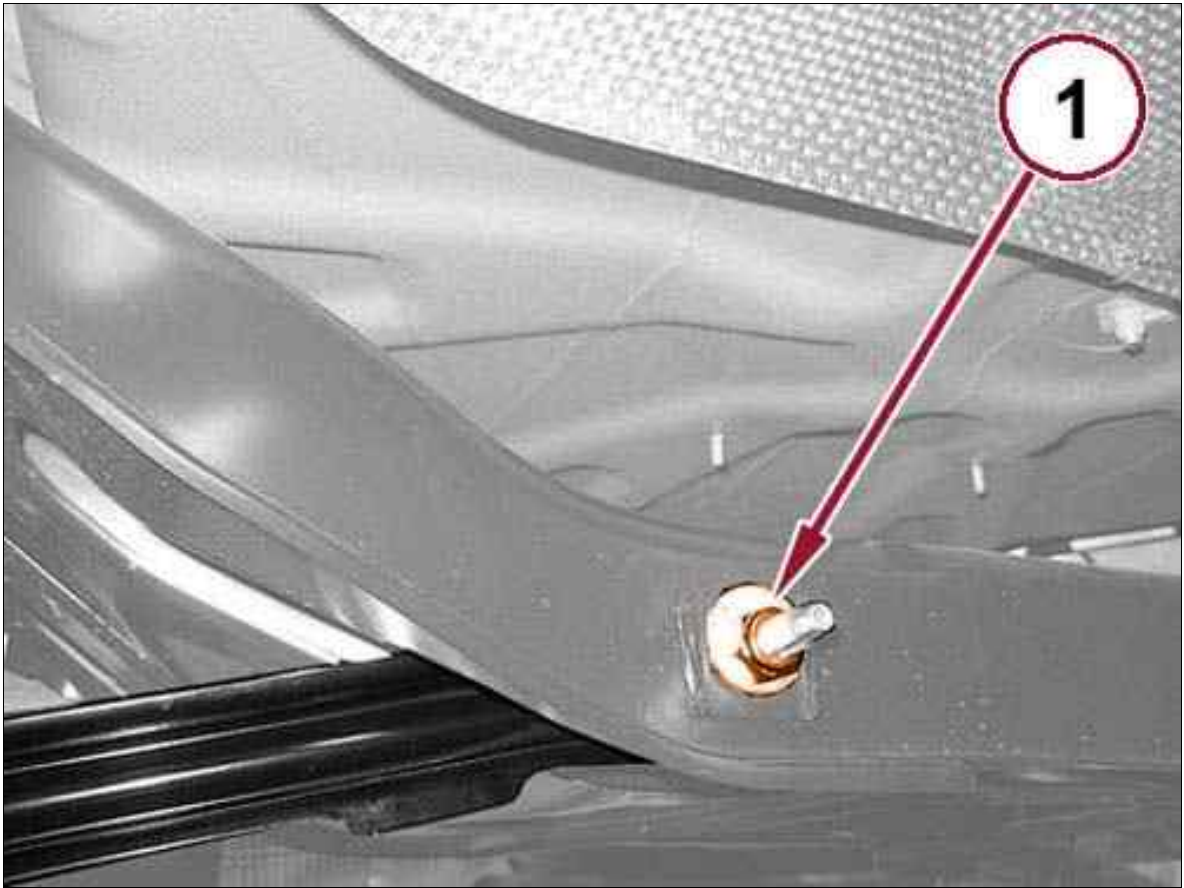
Rear Lower Control Arm To Knuckle Bolt
